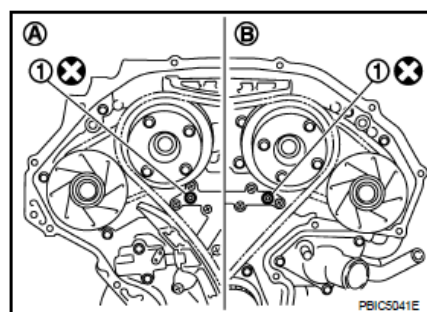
Identifying Rear Timing Chain Case O-Ring
